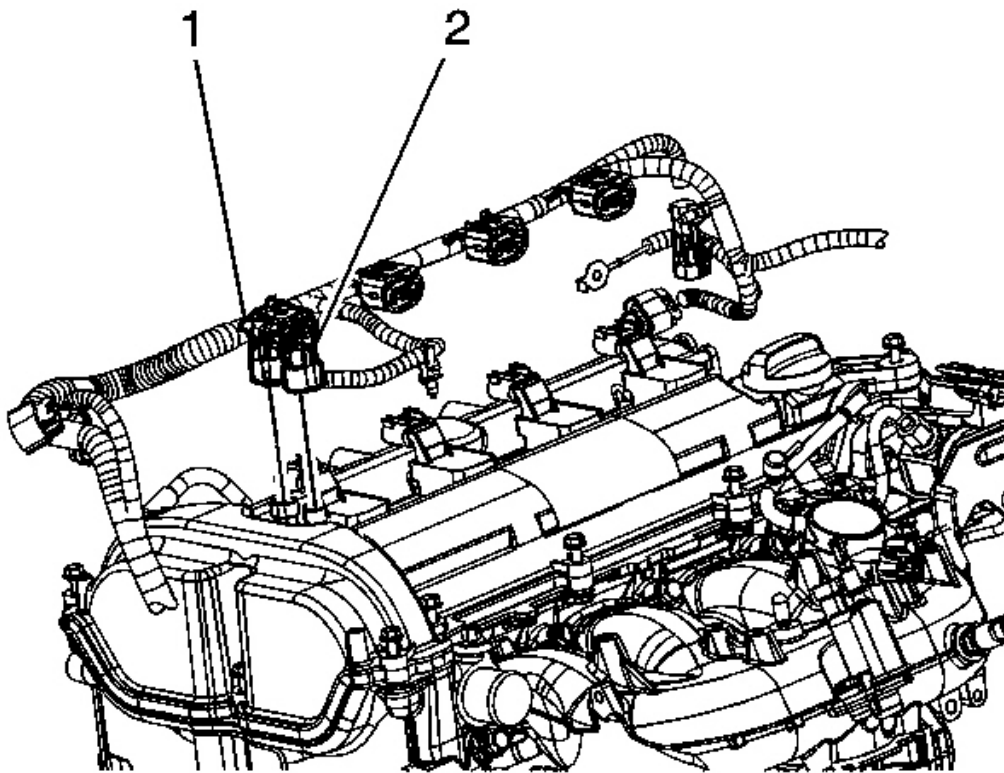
View Of Intake & Exhaust Camshaft Position Actuator Solenoid Valve
